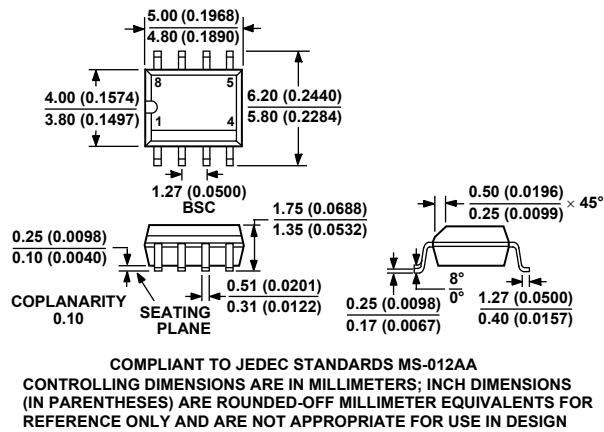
8-Lead Standard Small Outline Package [SOIC]
